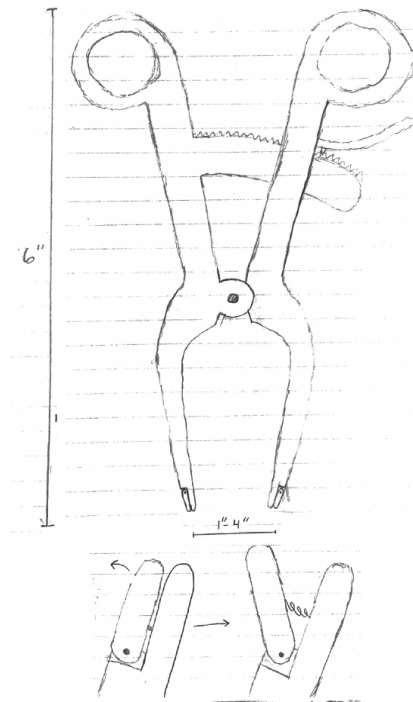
Adapted Weitlaner design sketch with ratchet system, split tips, and springs.
